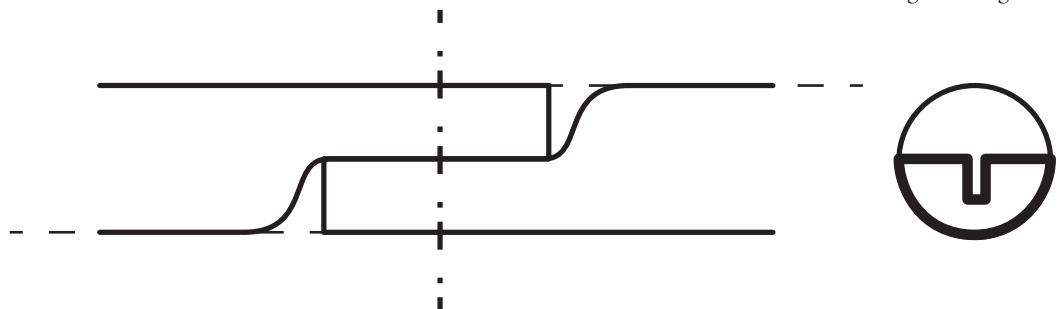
Compressing the pipes as illustrated form a half in half joint with maintained outer radius of the tubes.
